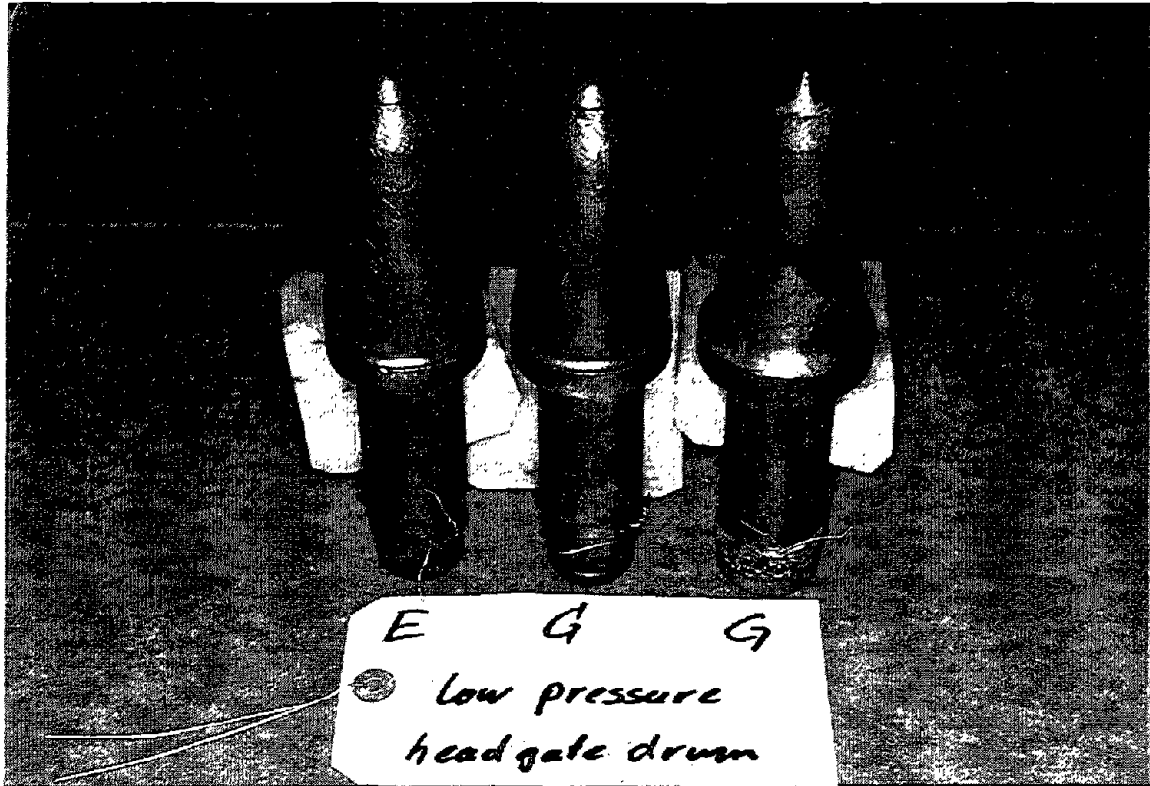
Sample bits from headgate drum after low-pressure cutting, 34 rpm: E: endring; C: center of drum; G: gobside
